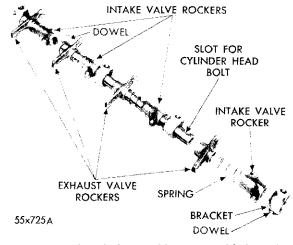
Rocker Shaft Assembly (Disassembled View) (SpitFire)
